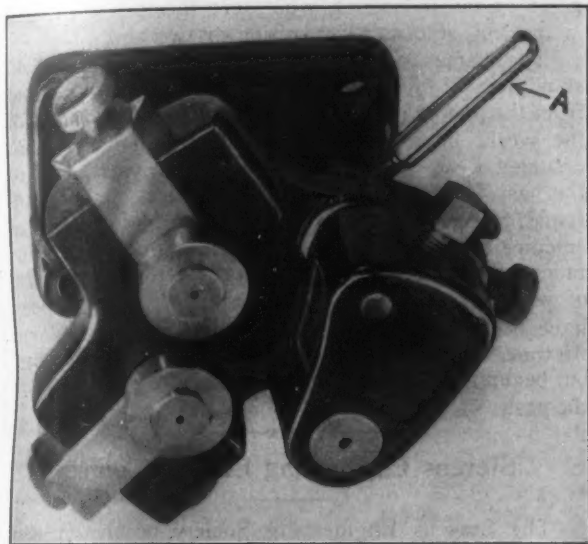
A New Turret Lathe Turning Tool Made by the Acme Machine Tool Company, Cincinnati, Ohio.
